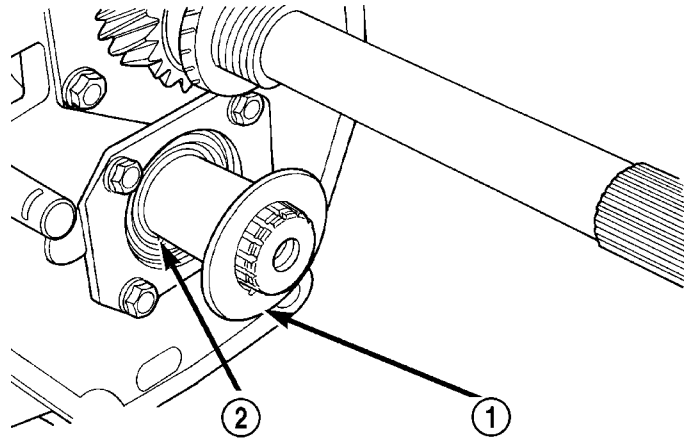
COUNTERSHAFT FIFTH GEAR NEEDLE BEARING
